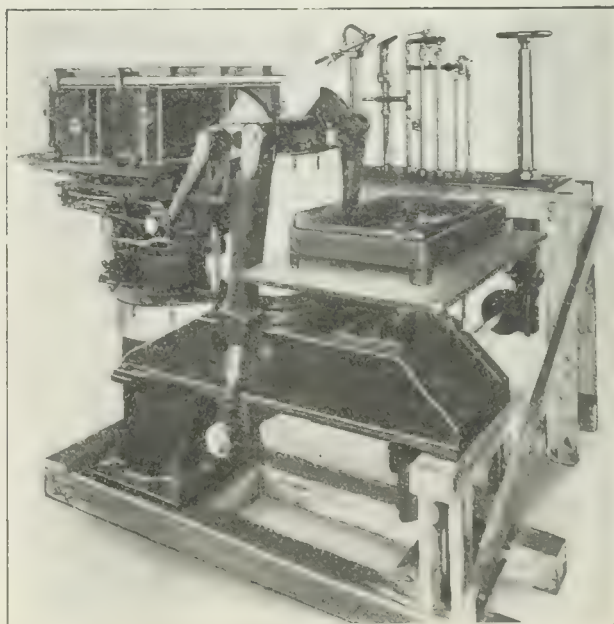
The Combination Jarring and Roll-Over Molding Machine Made by the Tabor Mfg. Company, Philadelphia, Pa.
